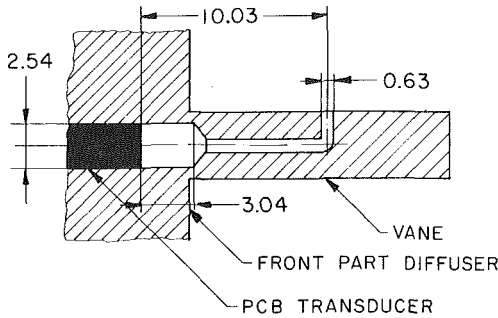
Geometry of the diffuser vane and impeller blade pressure taps
